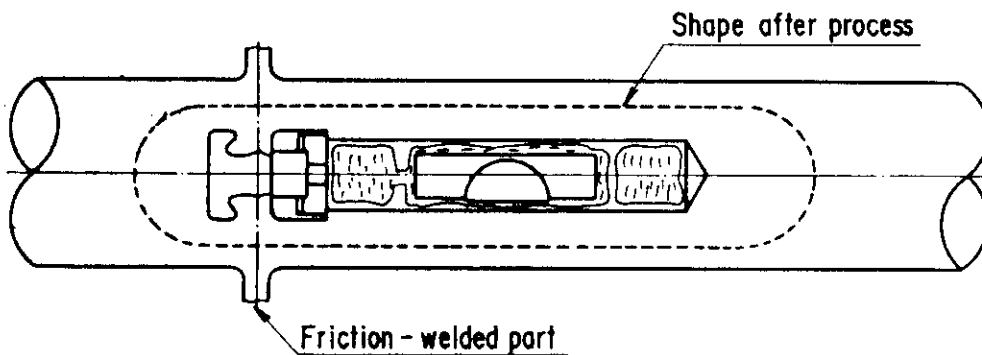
Shape of University Rabbit after Friction Welding
